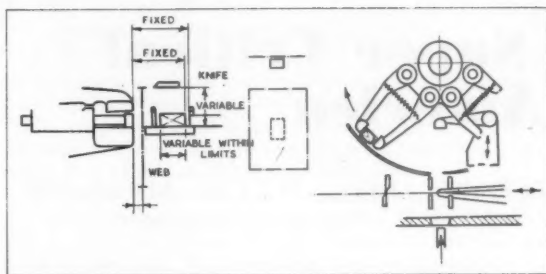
When changing for different sizes some details are worked from fixed faces chiefly for widthwise dimension. The lengthwise dimension is usually central about the centre-line of the machine. For this type of machine the change parts are generally worked centrally in both directions
